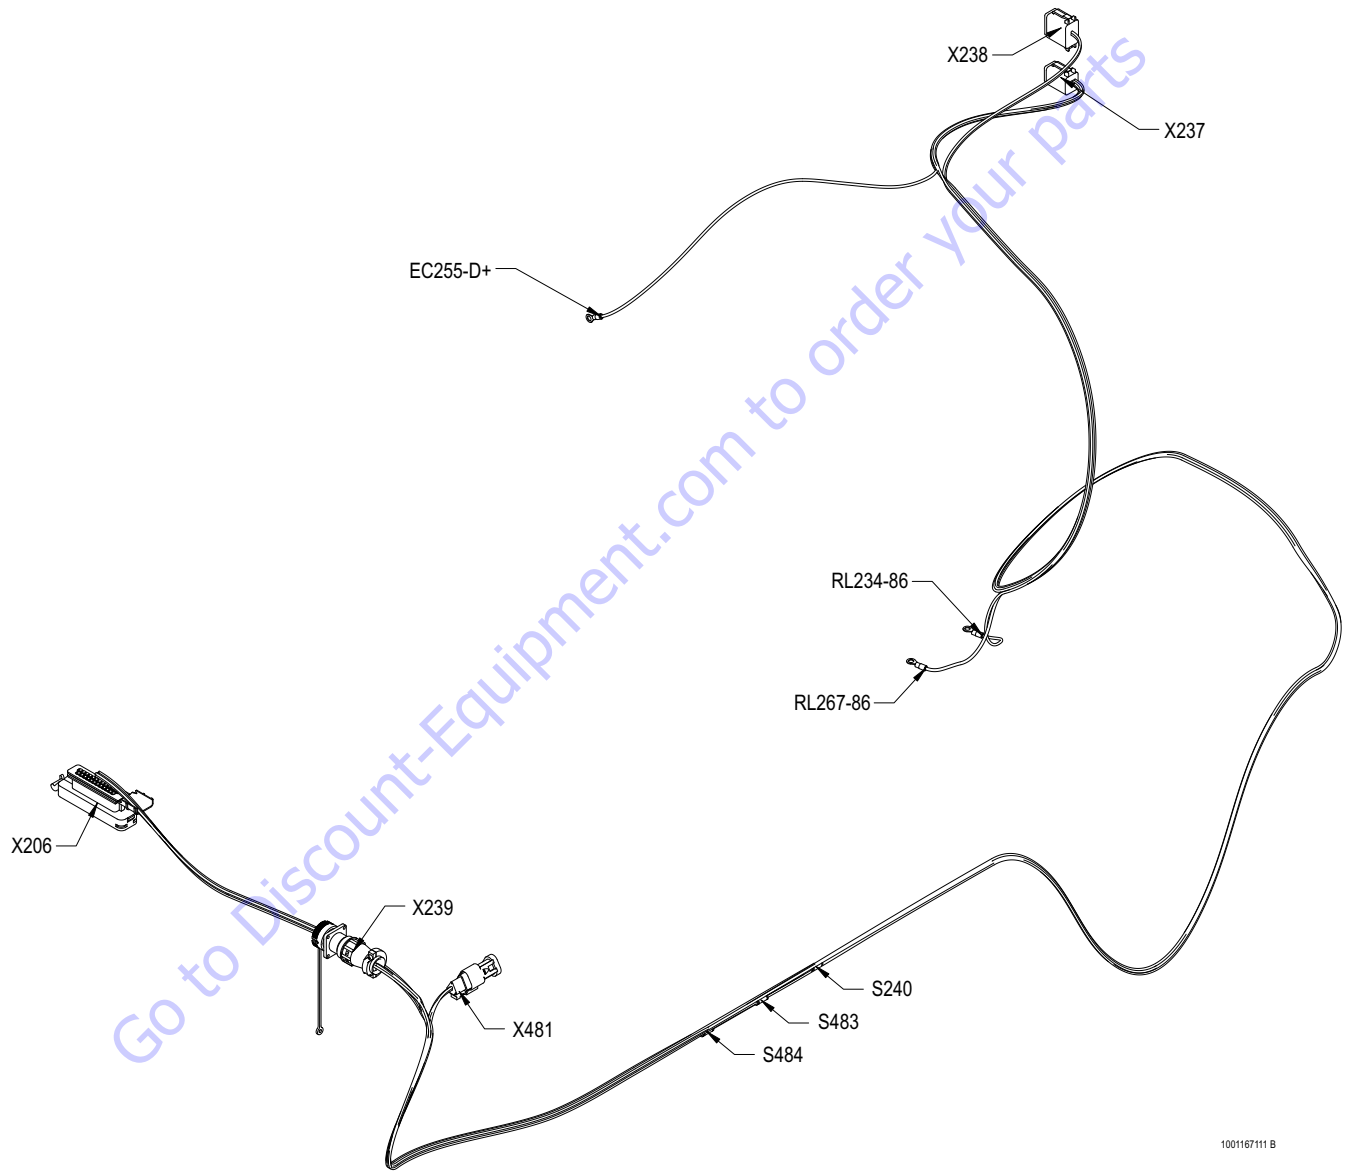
Deutz T4i Harness - Sheet 4 of 4
